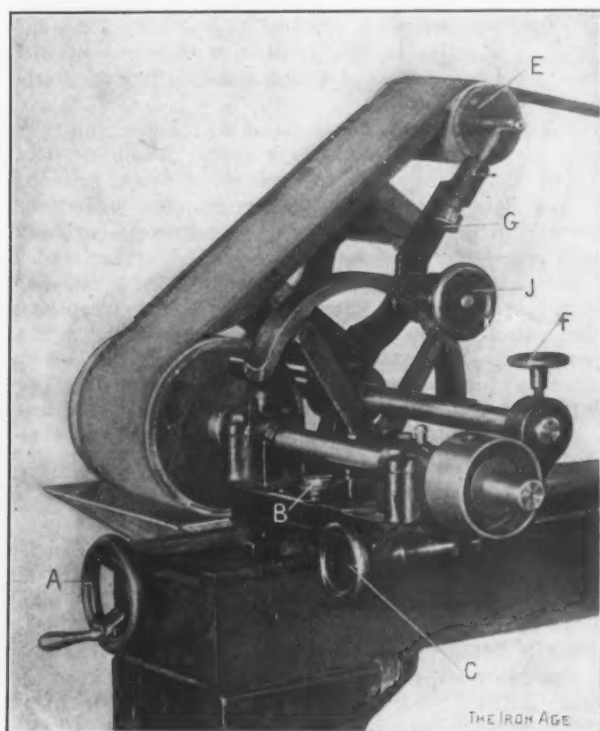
Detail of the Head Showing a Different Adjustment of the Rollers.
